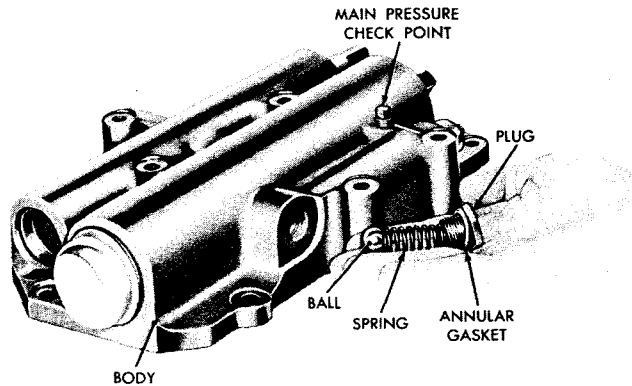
Removing or installing plug, annular gasket, spring, and ball from range selector valve body
